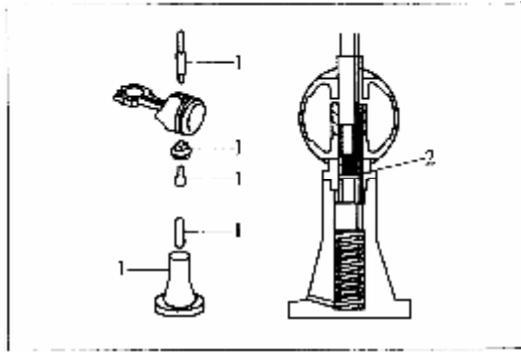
Special Tools to Dismantle Piston and Connecting Rod Assemblies
